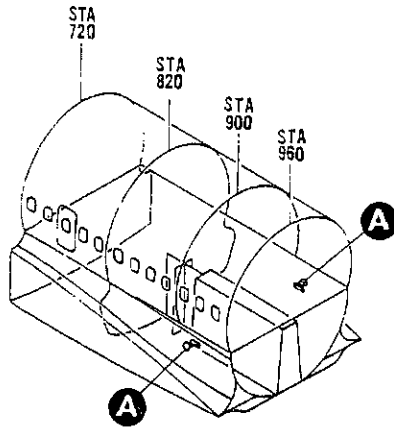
VALVE INSTL. AIR STARTER RELIEF
